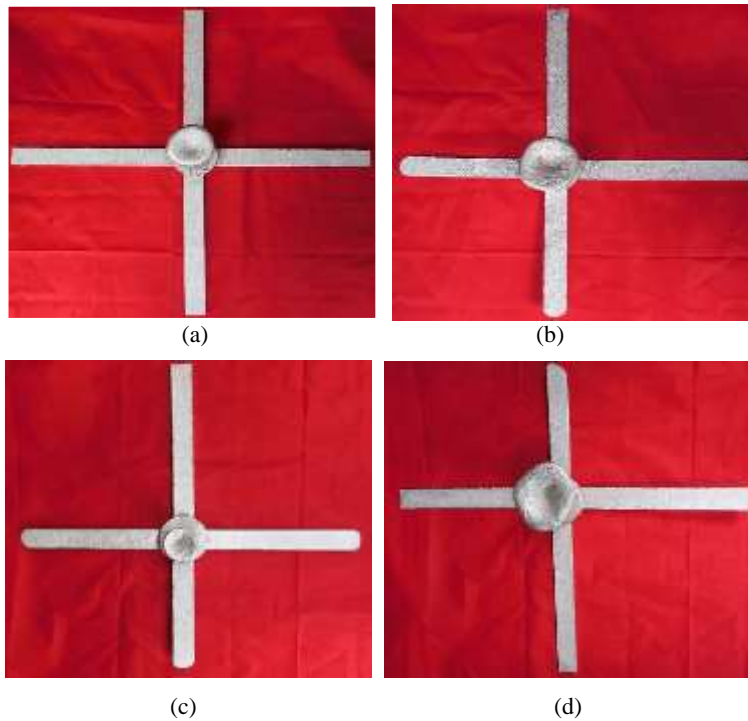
Fluidity castings for maximum: (a) Fluidity (b) Tensile strength, (c) VHN and (d) BHN.
